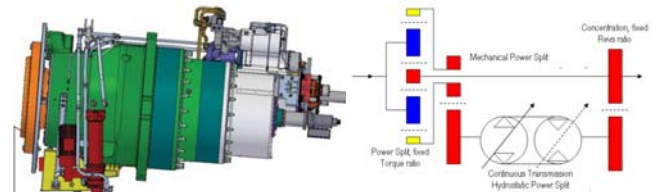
Hydrostatic CVT gearbox attached on output side of main gearbox, working principle [6]
